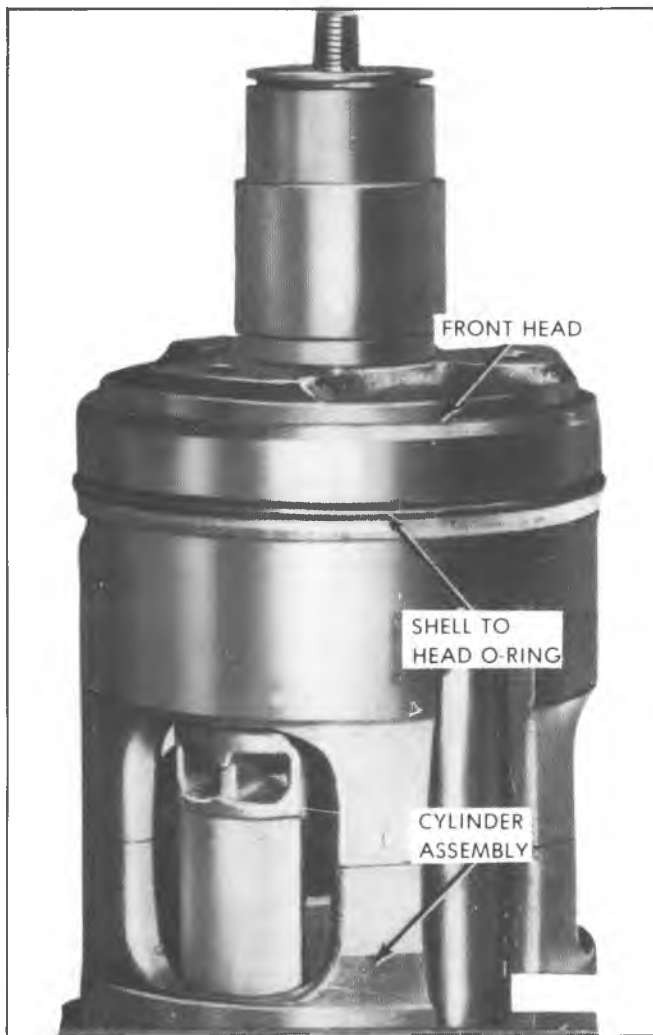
A-6 Shell-To-Front Head O-Ring Installation
